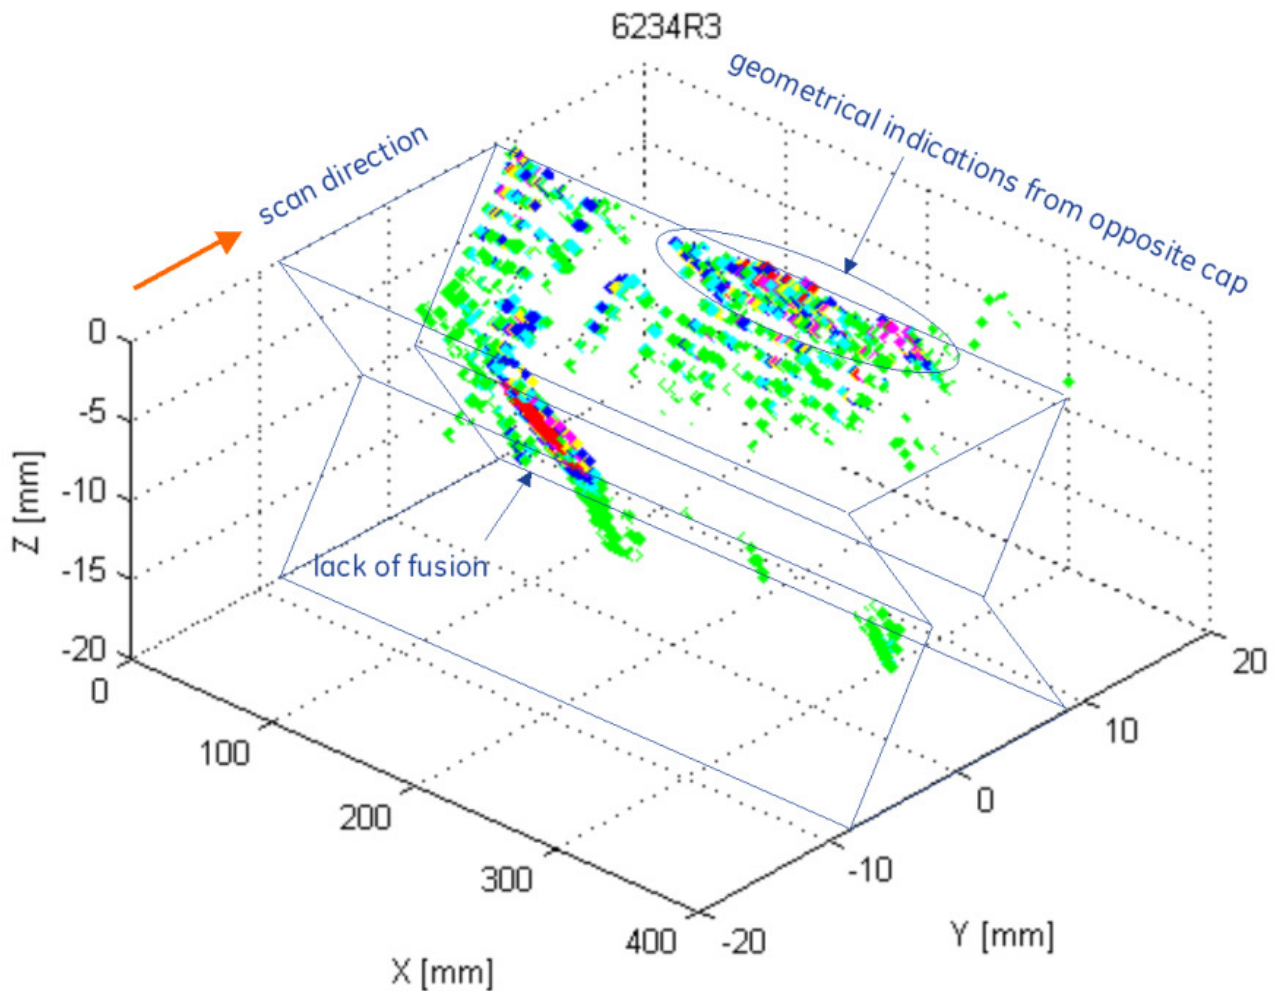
3D view of weld 6234 (with MATLAB)
